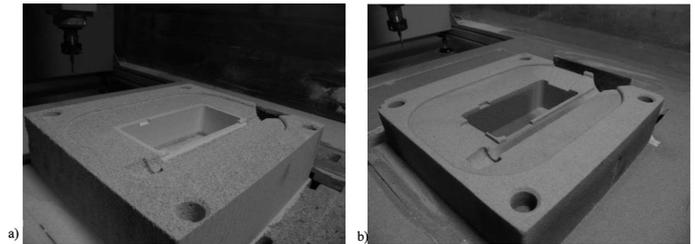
Individual parts of the molds produced by Patternless process technology a) Foamed gypsum block b) Molding compound with silica sand SH35
